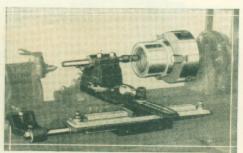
Cutting an Internal Tapered Thread with the Taper Attachment
